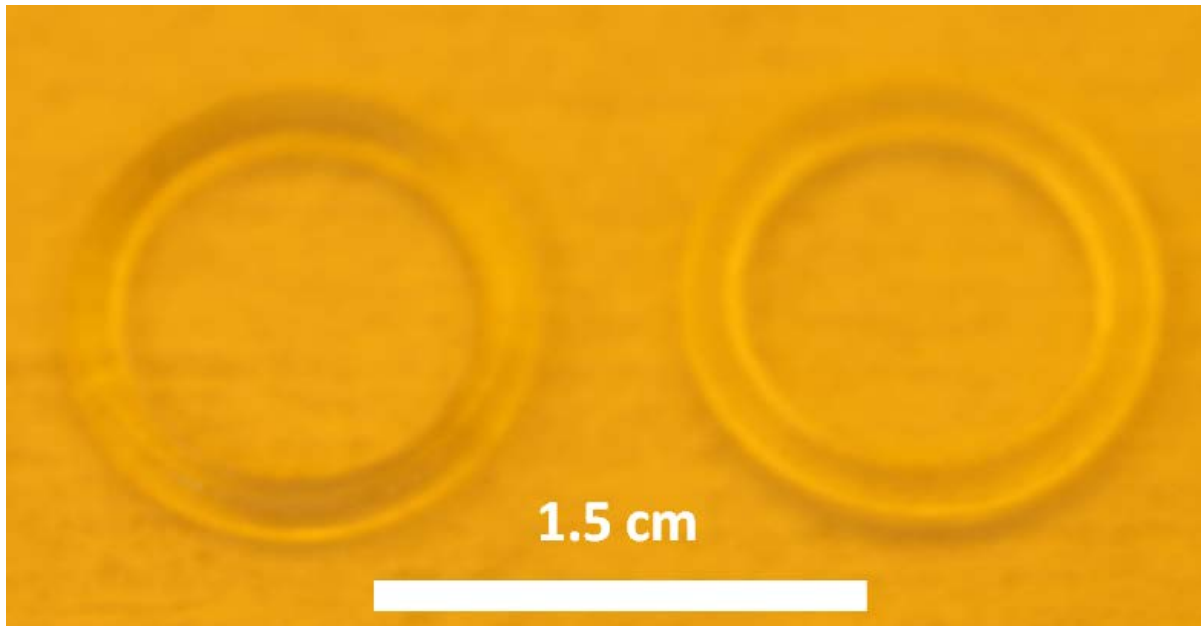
013 O-ring Gasket, glossy side (left) and matte side (right)
